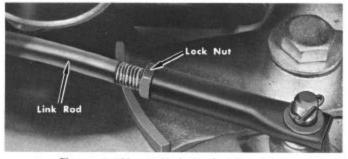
Upper Shift Shaft Adjustment B. Flywheel and Magneto Pulley Timing
